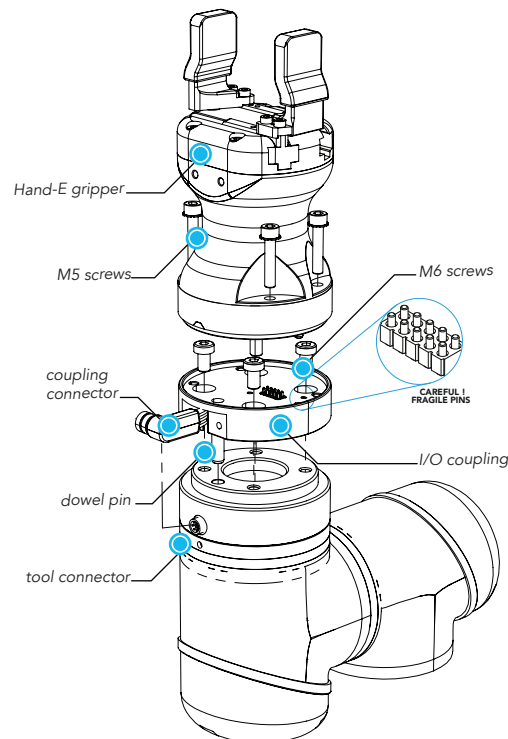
Hand-E wrist connection kit exploded view, on robot arm.
